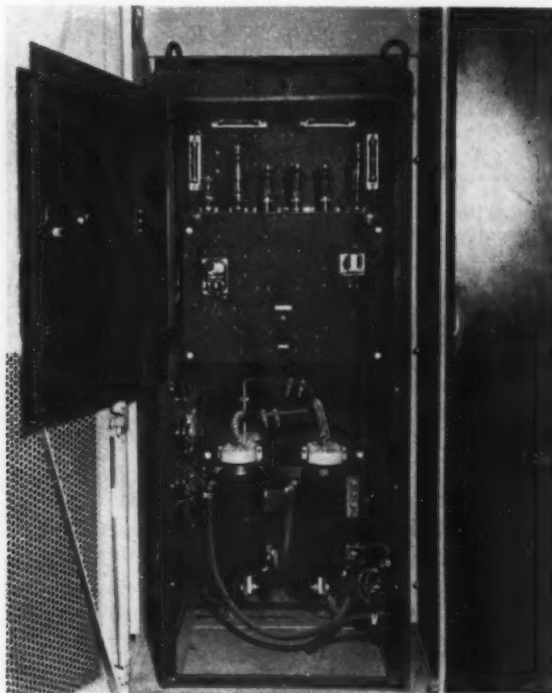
Continuous power is supplied to the weld by this electronic flash welder. Components are the Ignitron contactors, the synchronous timer, and the firing control.
